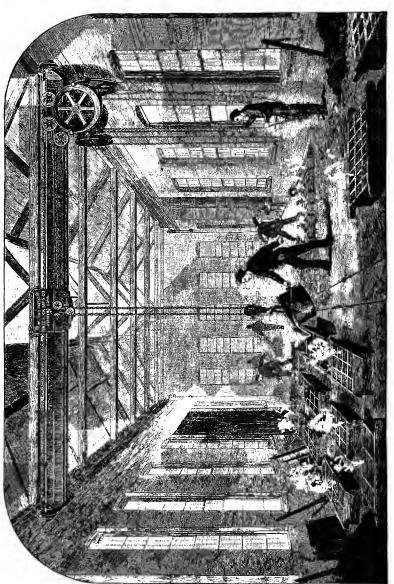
Hand Traveling Crane, with Fixed Crab.
